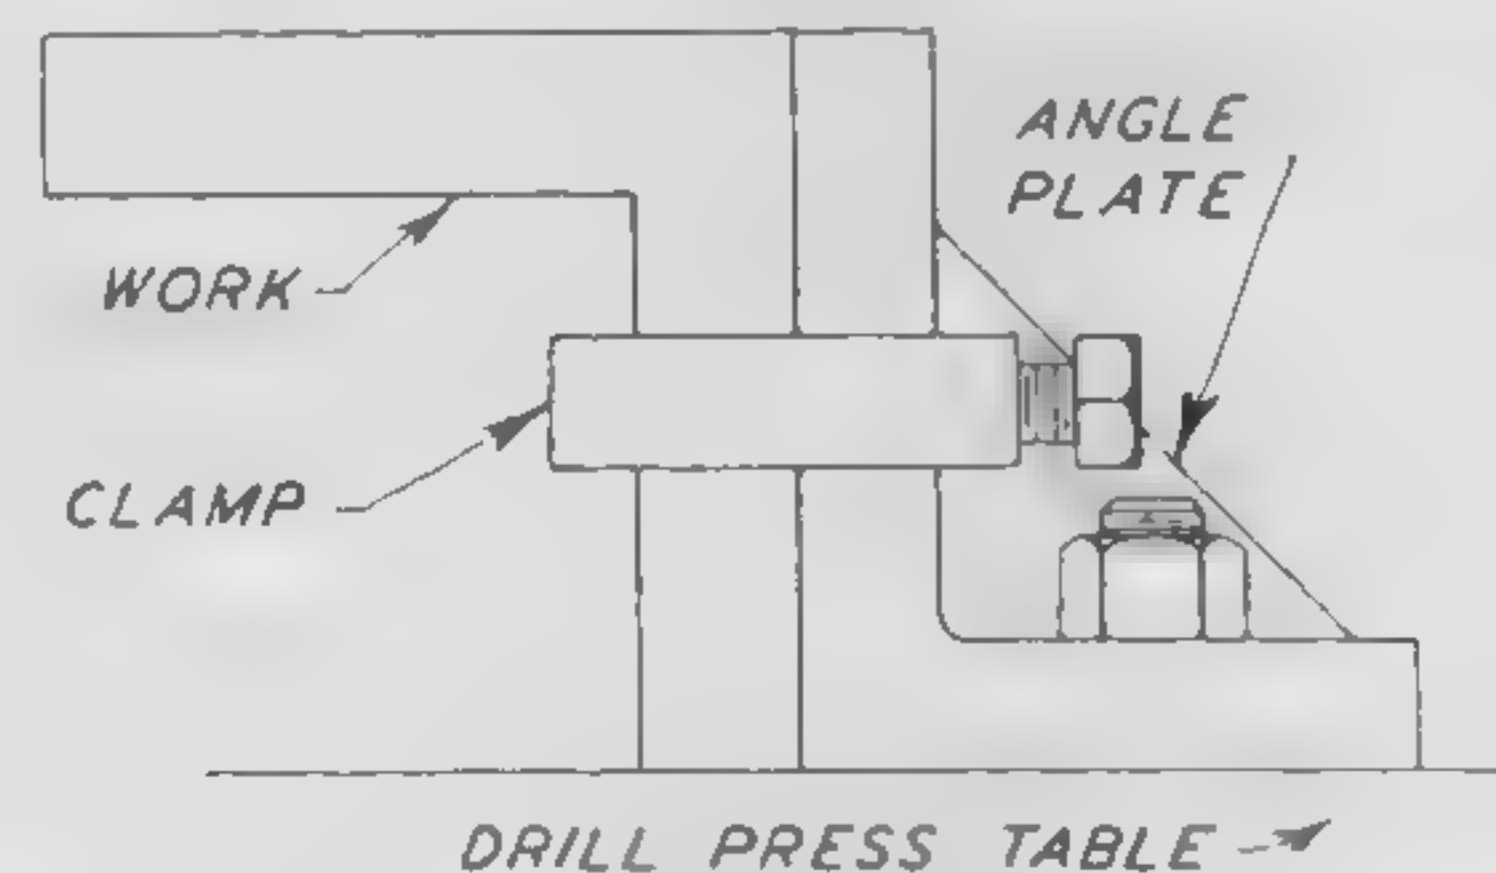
Clamping Work to Table with the Help of an Angle Plate
